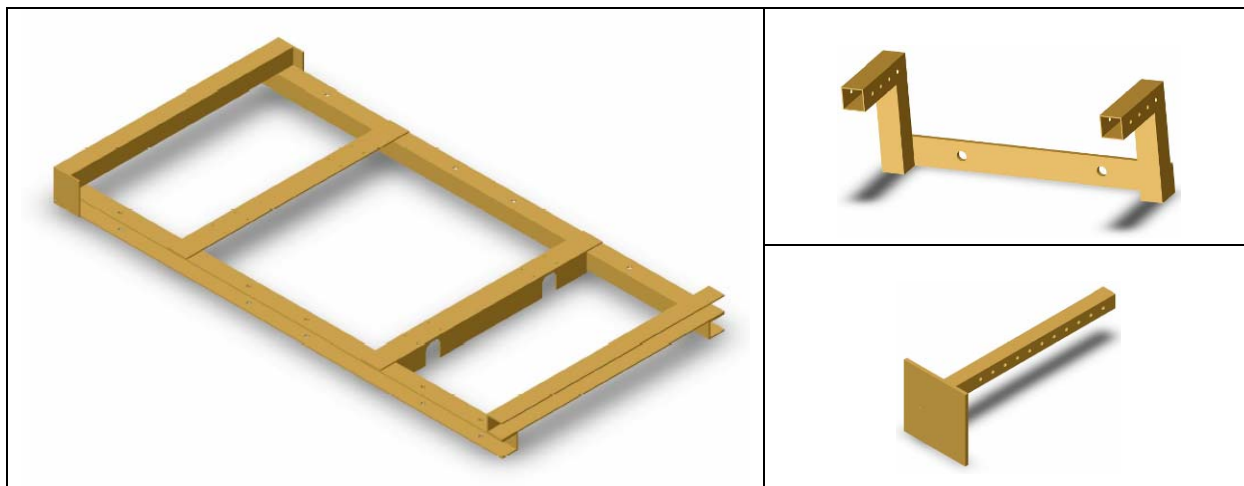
Three-dimensional assembly views of the backslider frame (left), shoulder harness (top right), and shoulder pad (bottom right). All individual components are fabricated from steel and welded together to form the assemblies.
